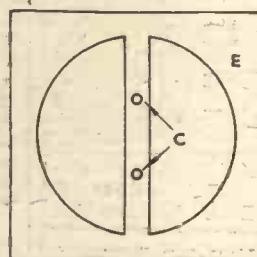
A baffle with centre strip showing fixing holes for unit.
